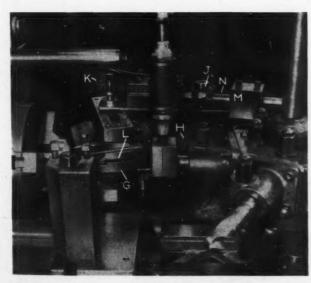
Close-up view of the special taper-turning attachment seen in Fig. 7
